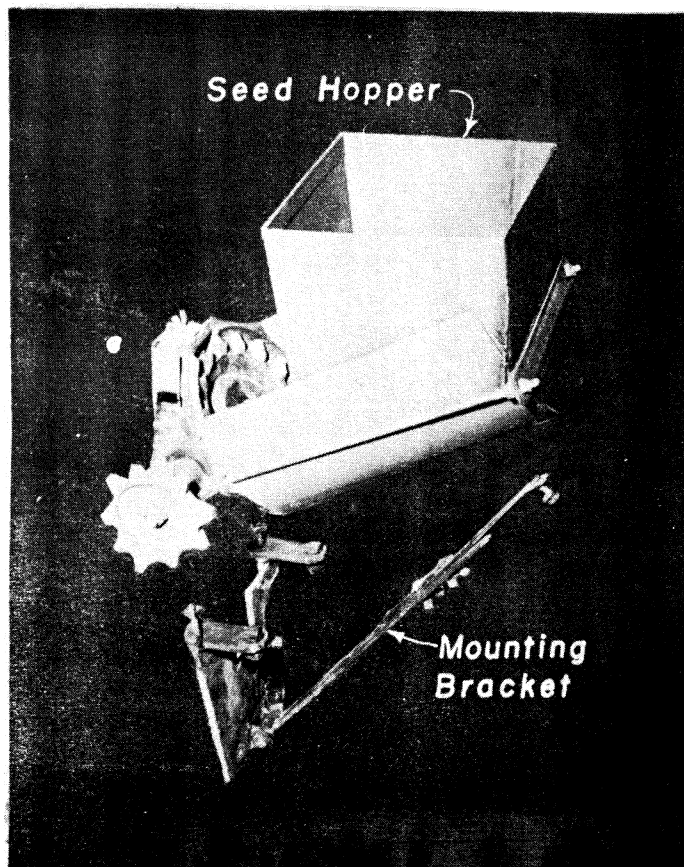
Mounting bracket for attaching inclined seed hopper to planter.
